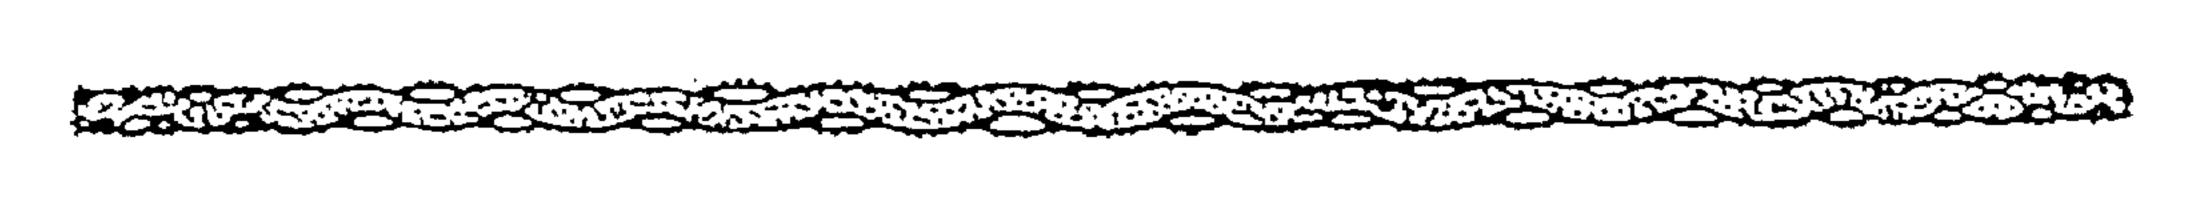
is an enlarged view of part 6—6 of the cross-section of the diamond abrasive saw blade shown in FIG. 7 and shows the electrodeposited diamonds on the periphery of the saw blade; and,
